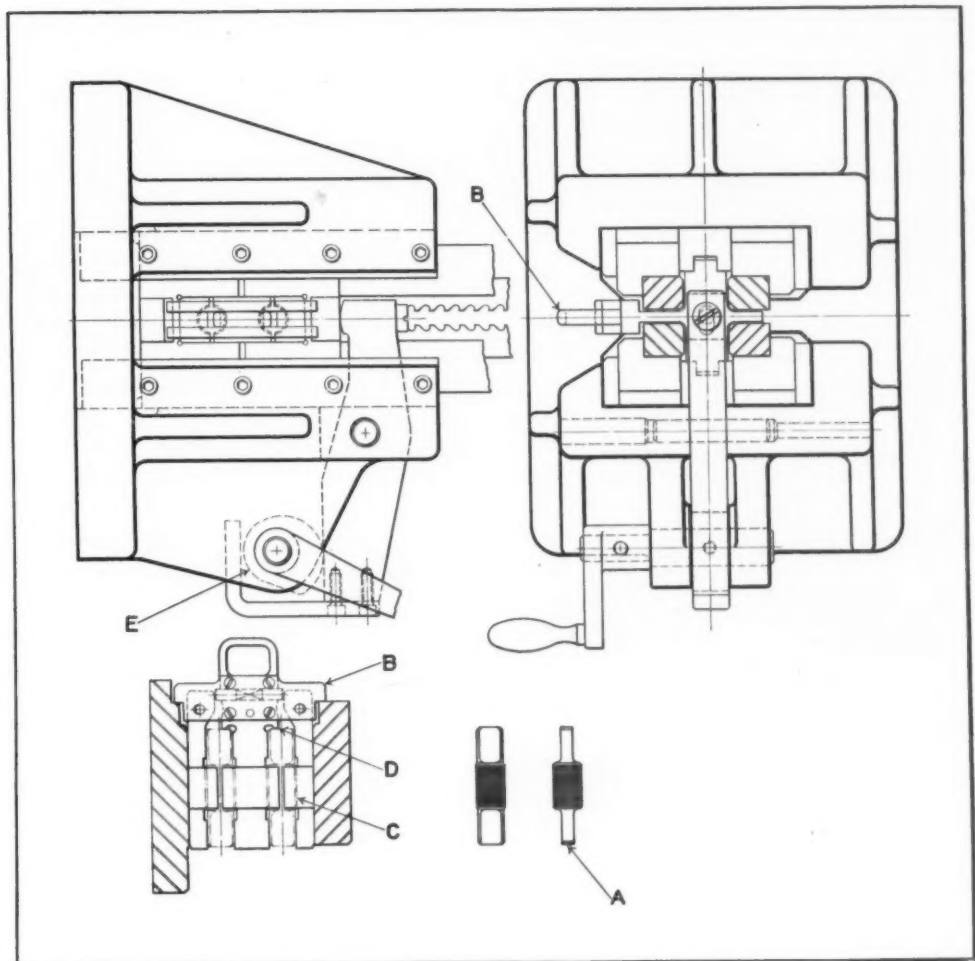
Work-loading Cradle that is a Feature of the Fixture Shown in Fig. 8
